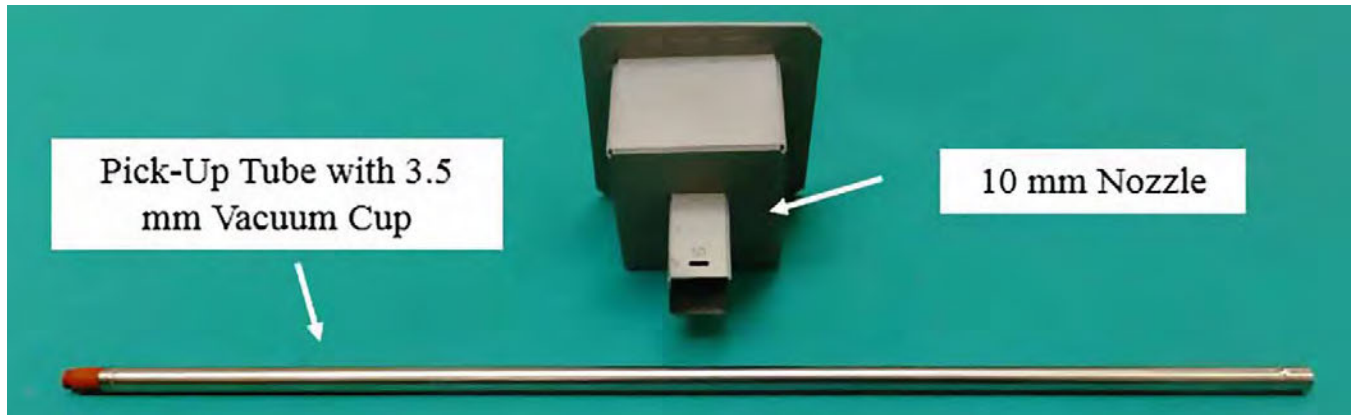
Photograph showing the 10 mm nozzle, metal pick-up tube, and 3.5 mm cup used during vacuum pick-up of the WLP.
